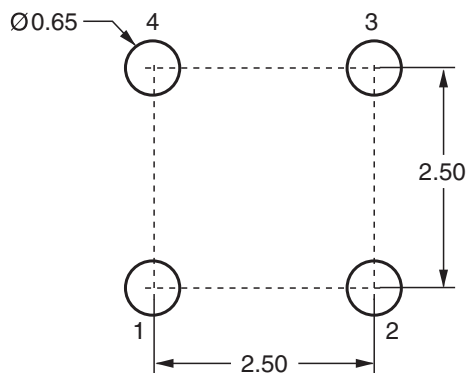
Microcoupler (FODB10X) Footprint for PCB Layout
